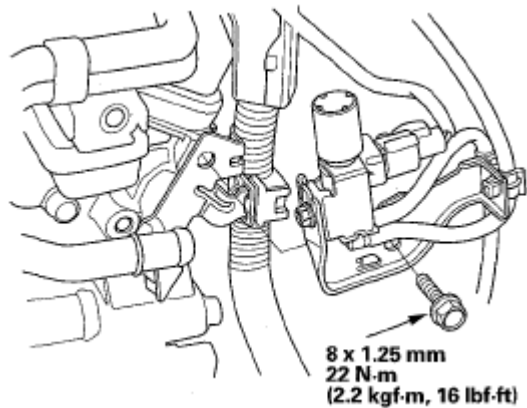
Identifying Harness Clamp Bracket Bolt With Torque Specifications
